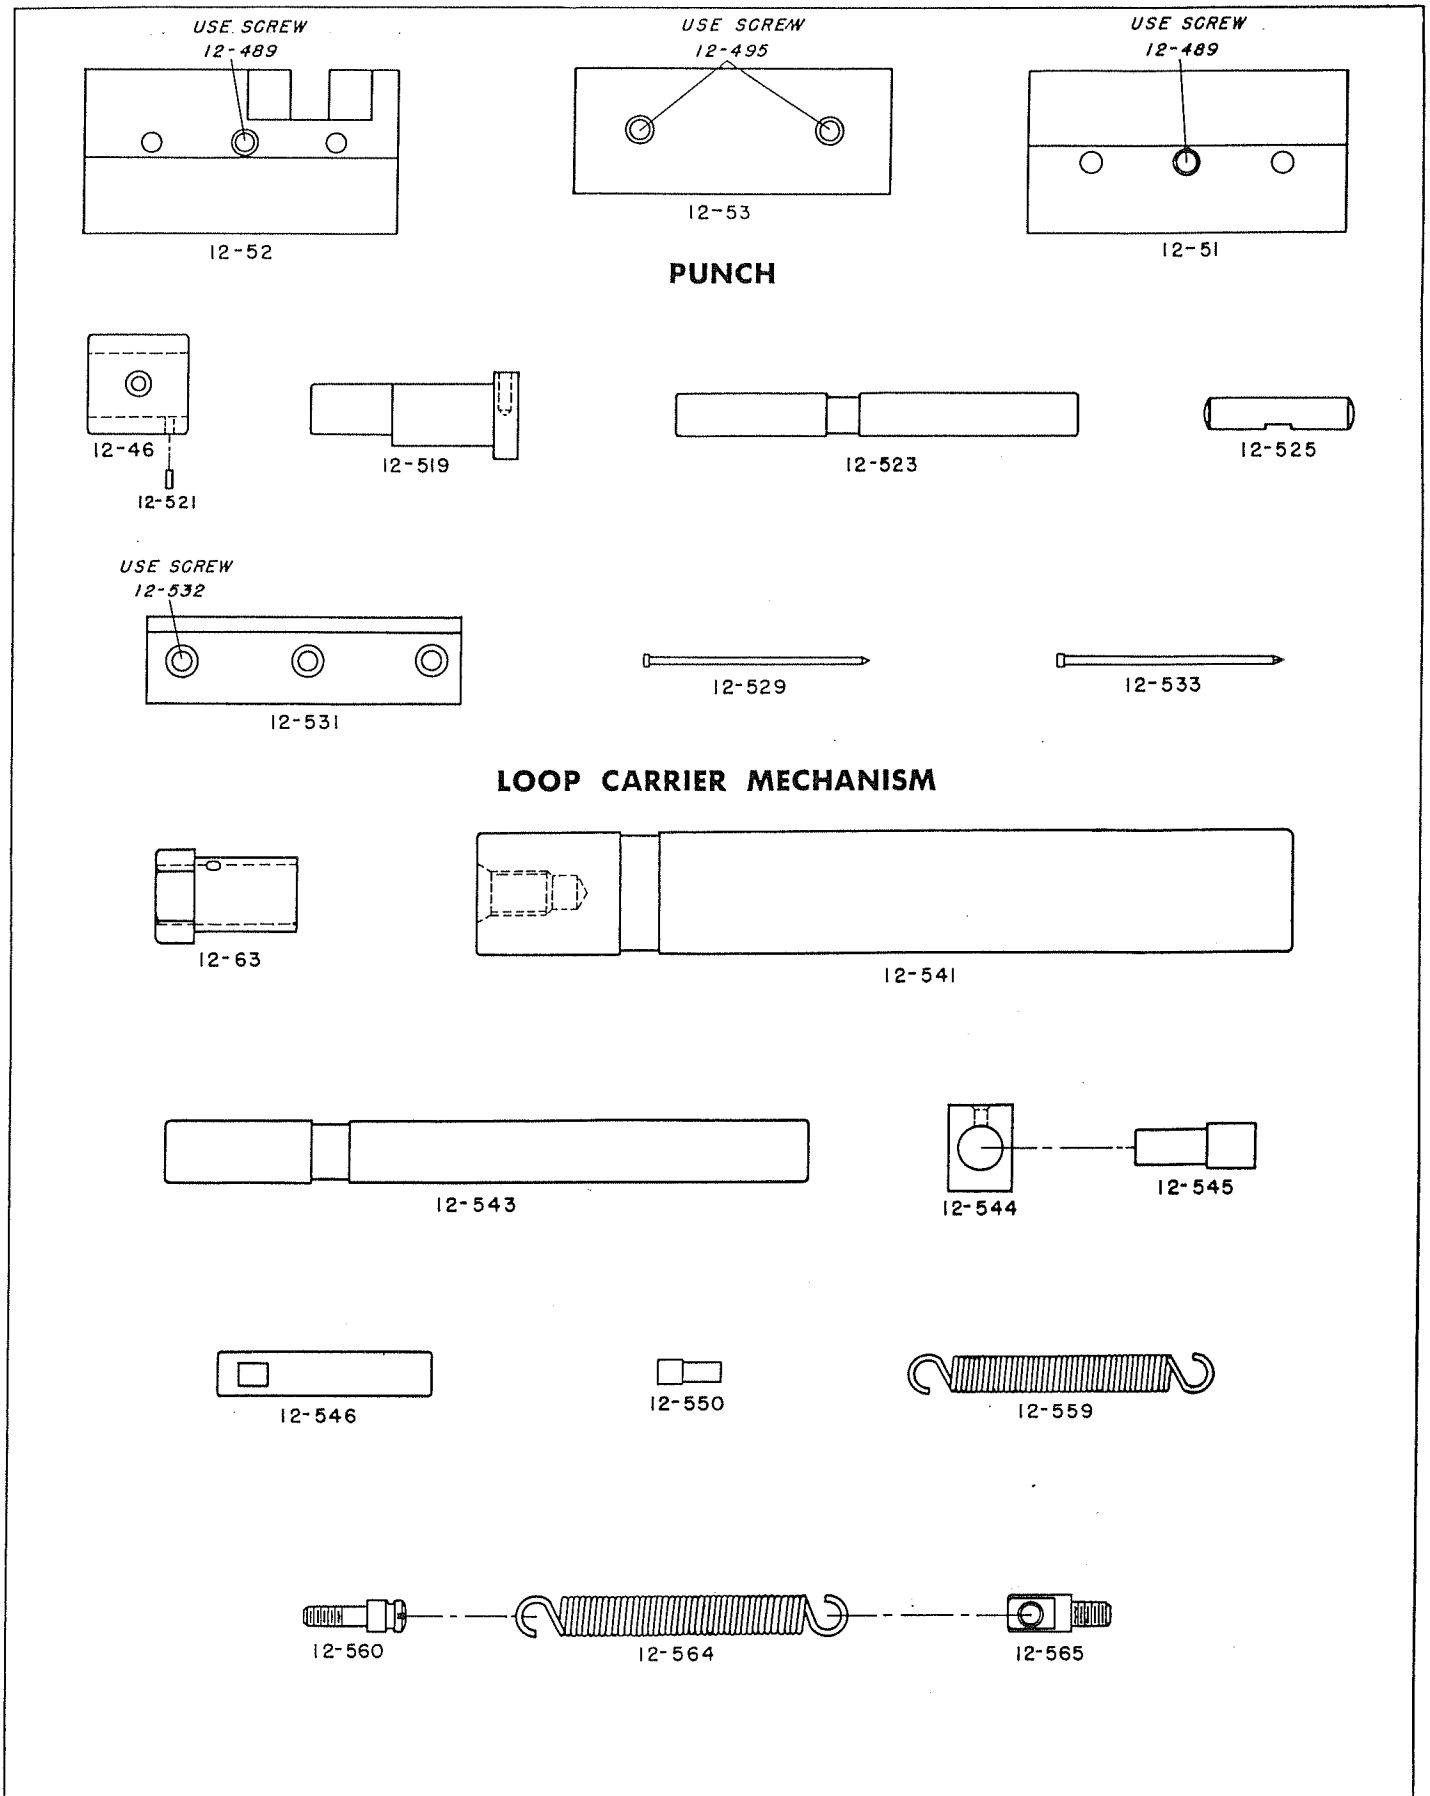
Punch and Loop Carrier Mechanism Parts (approximately 1/2 size)
